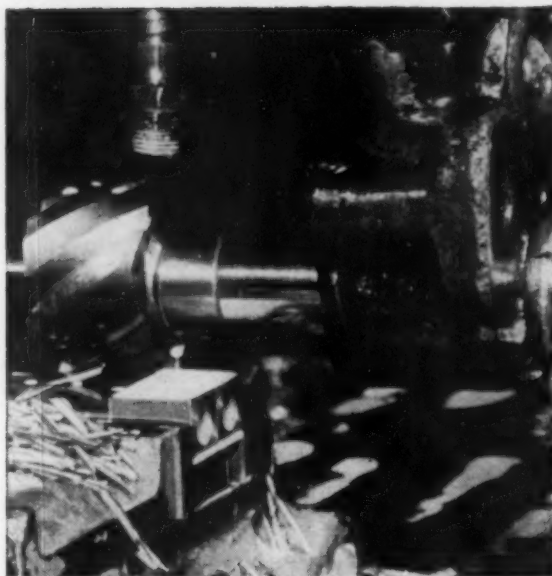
Slab milling blanks for titanium lugs. A high-speed steel cutter is recommended.
